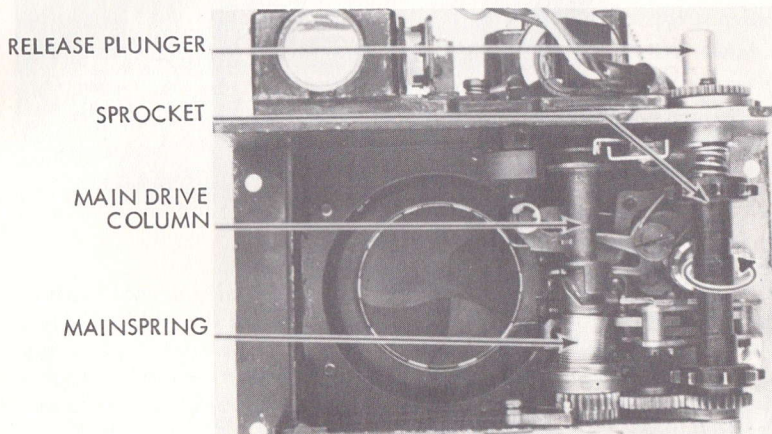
FRONT PLATE/SHUTTER ASSEMBLY
